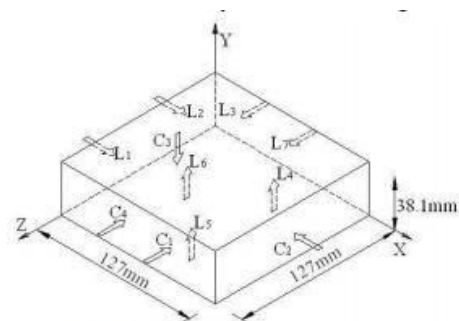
Work-fixture configuration of 3-2-1 layout with additional clamp
